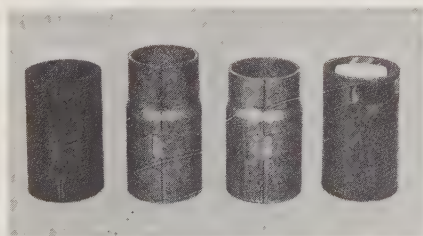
Generator frame, largest part manufactured by a cold metal-moving process, begins with a low-carbon-plate steel which is rolled up to form a hollow cylinder. Extrusion and sizing operations follow.
